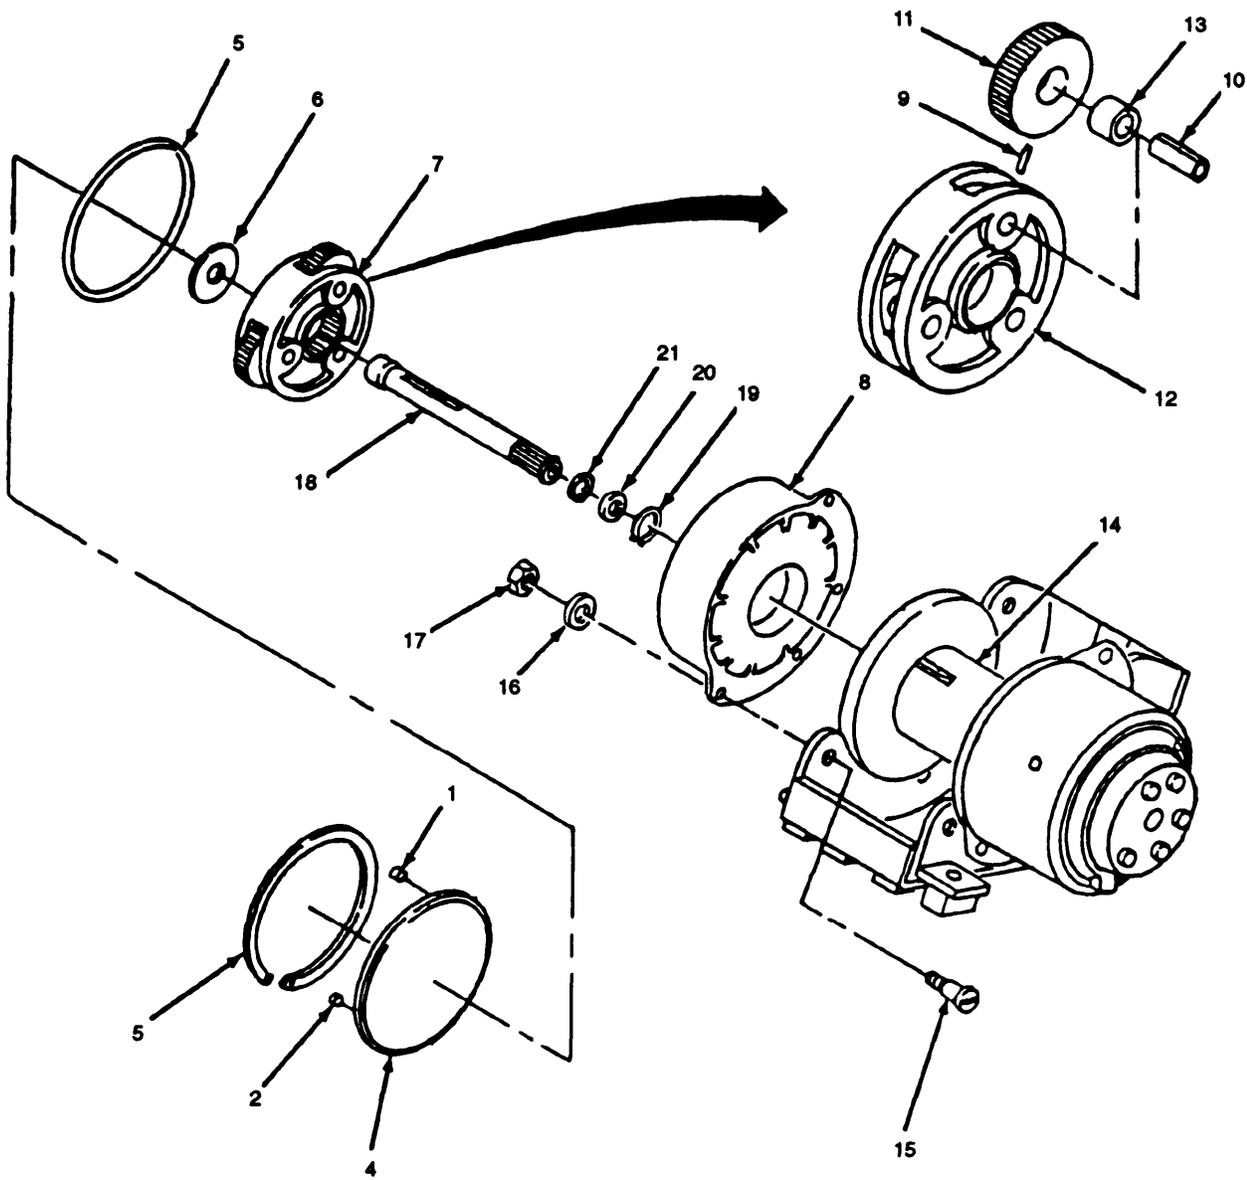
Winch Assembly Model 11-S-EC, Disassembly (Sheet 1 of 3).
